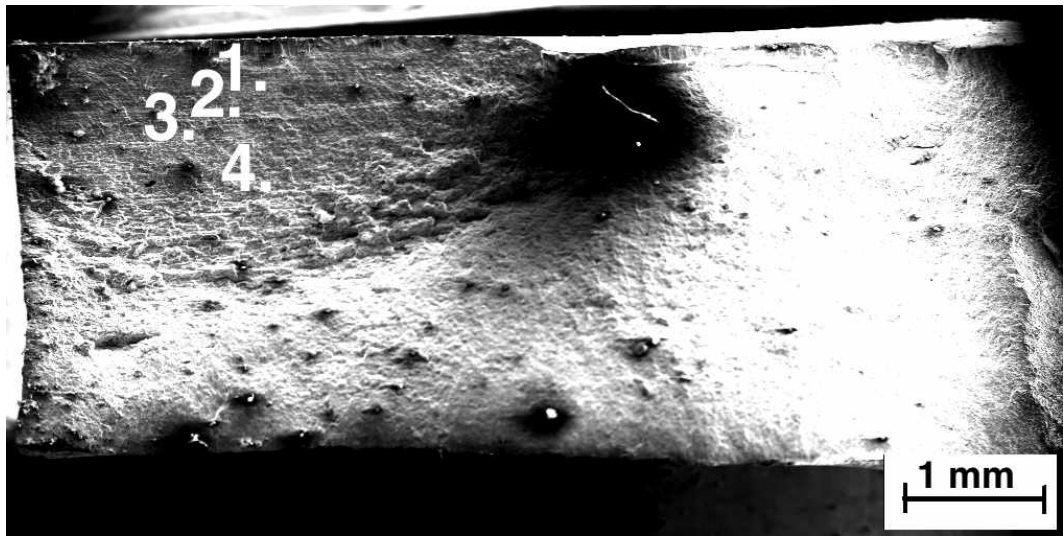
Overview of the fracture surface AA6082.52-T6 base material with fewest cycles to fracture. The numbers represent the different areas investigated further below.
